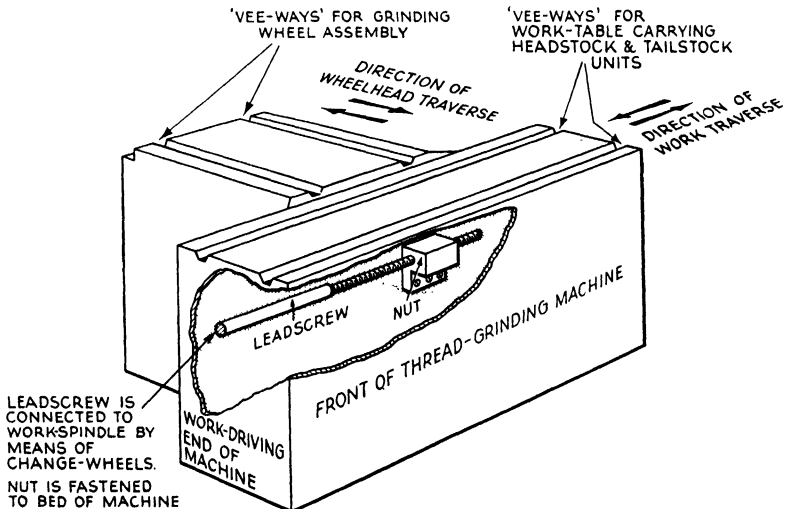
THE PRINCIPAL VEE-WAYS OF A THREAD-GRINDING MACHINE
